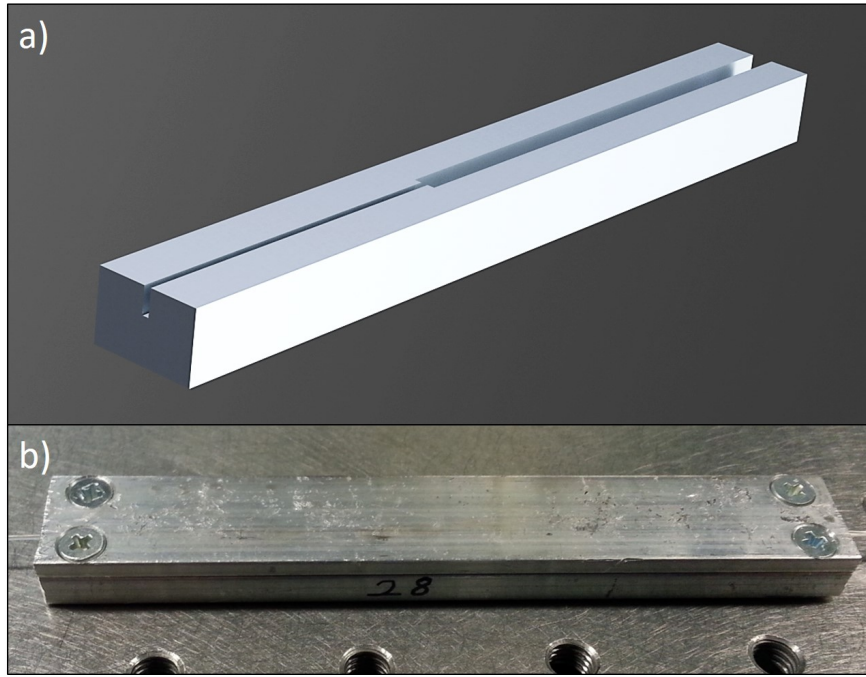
a) Designed heat sink of combiner, b) fabricated housing of combiner with top cover.
